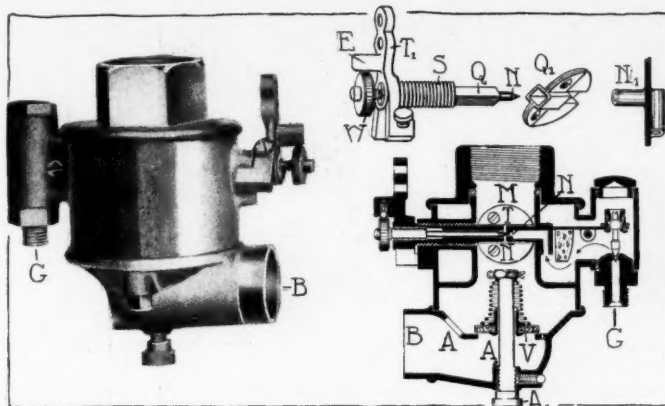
Outside of Eiker Carburetor. Fig. 5—Section of same
